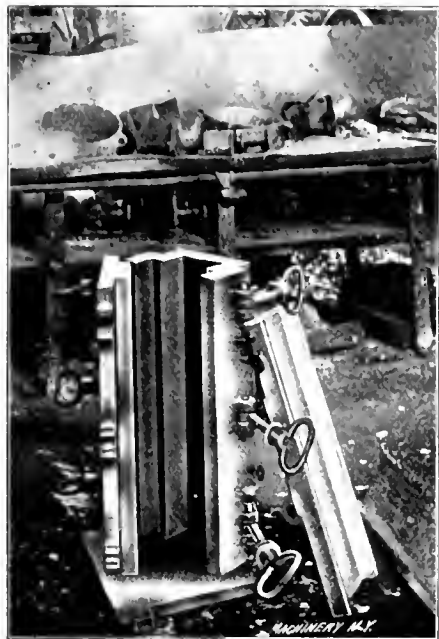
Mold for Babbitting Two-bar Guide Cross-head Gibs
